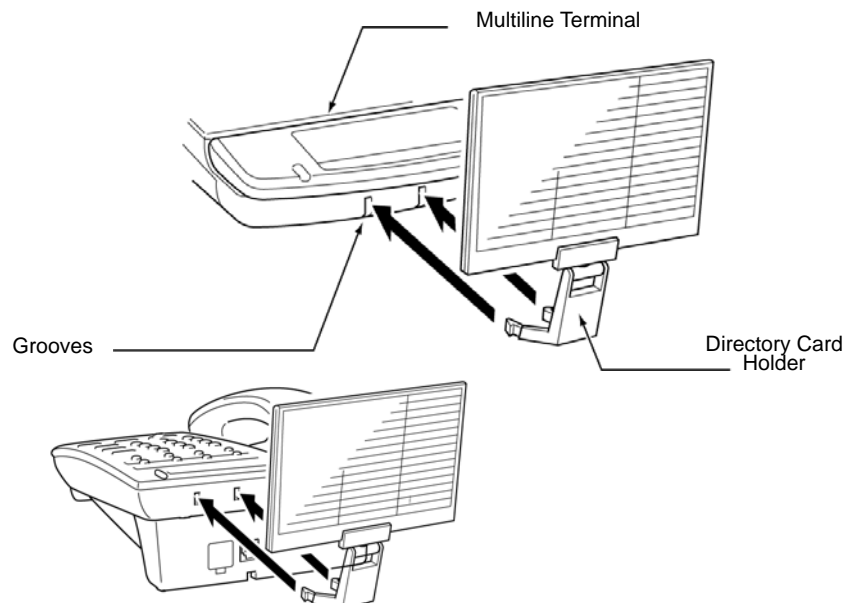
Attaching Directory Card Holder to the Multiline Terminal
